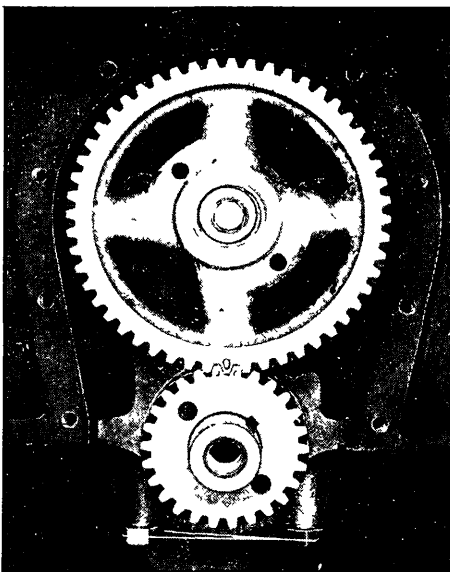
For correct valve timing, gears must be installed so the timing marks mesh as shown. 1951-52 V8 engine
